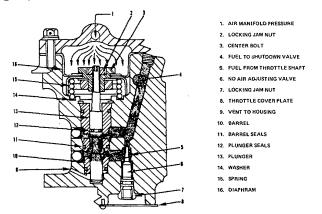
G-6. Cross-Section of AFC in Fuel Pump
